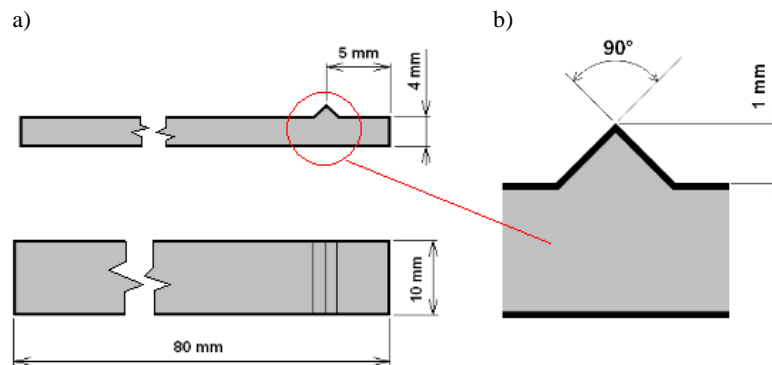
The dimensions of sample with ledge (a) and detail of ledge (b)
